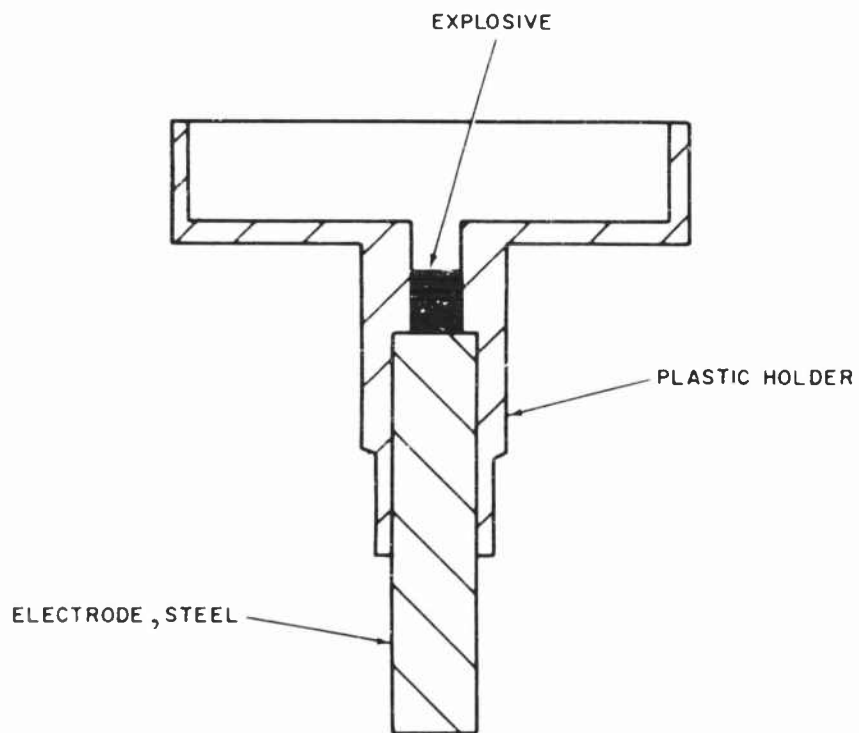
EXPLOSIVE SAMPLE HOLDER
